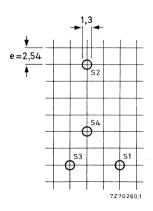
Hole pattern for mounting on a printed-wiring board (solder side).
